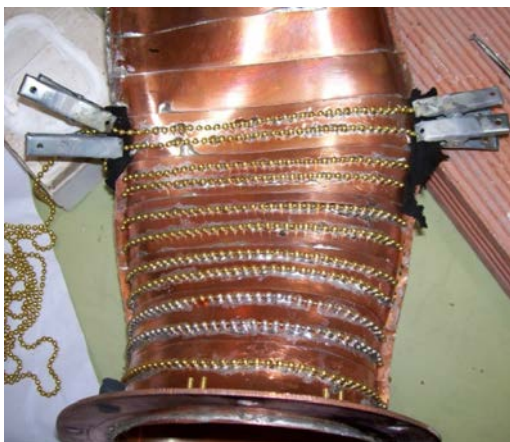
Soldering brass ball chains acting as claws, with Bi-Sn solder.
